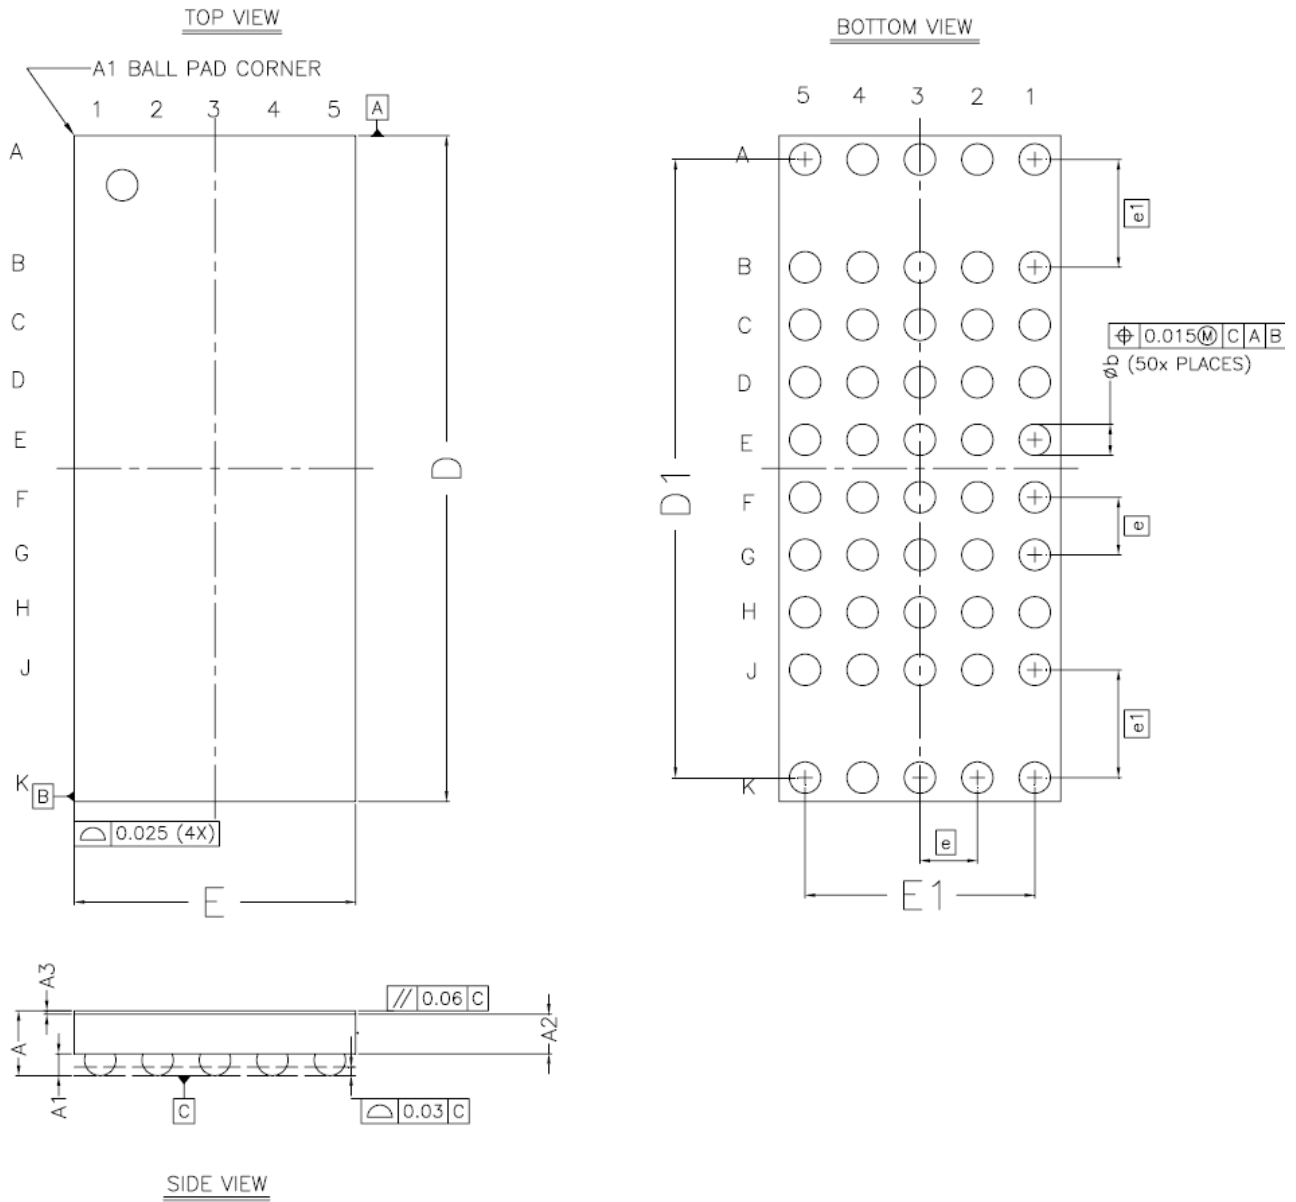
Package Outline Drawing Information for WLCSP (x16)
